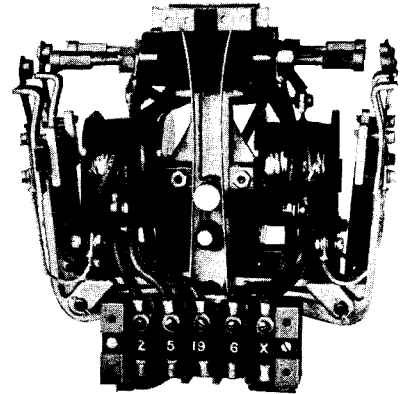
COVER MOUNTED TYPE AUXILIARY RELAY FOR MOUNTING ON TOP OF REGULATOR COVER
